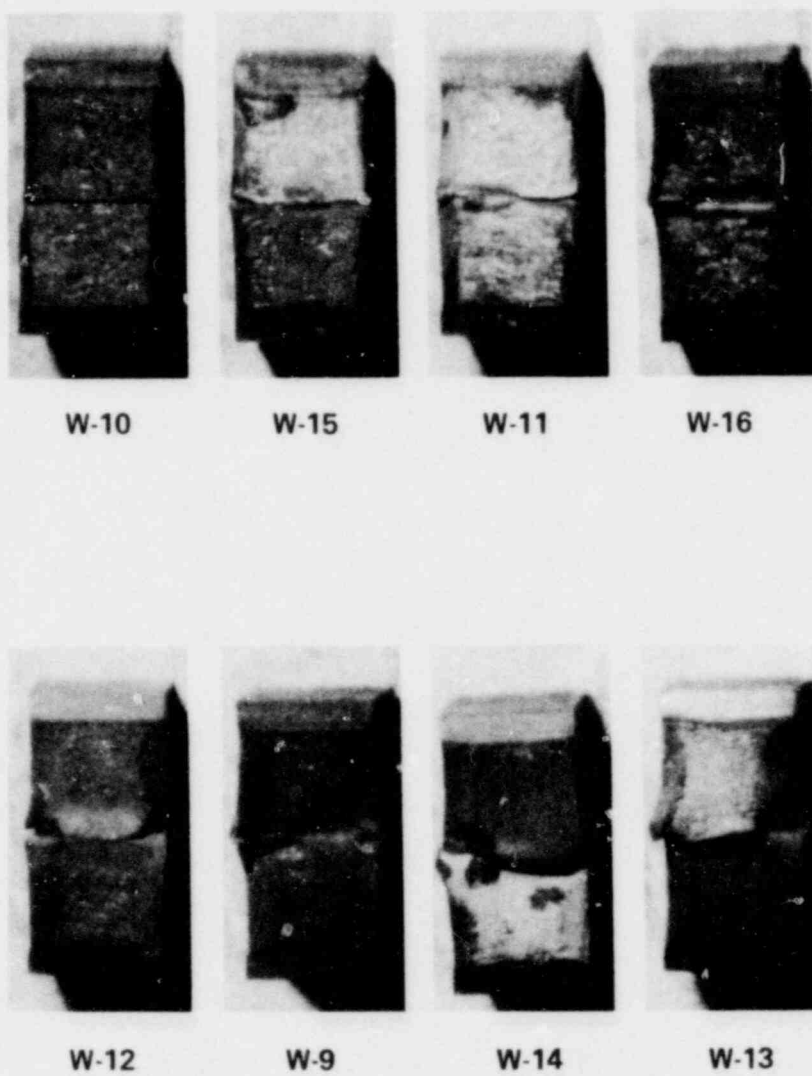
Charpy Impact Specimen Fracture Surfaces for Kewaunee Weld Metal
